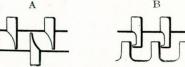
Labyrinth packing (A) radial clearance (B) axial
